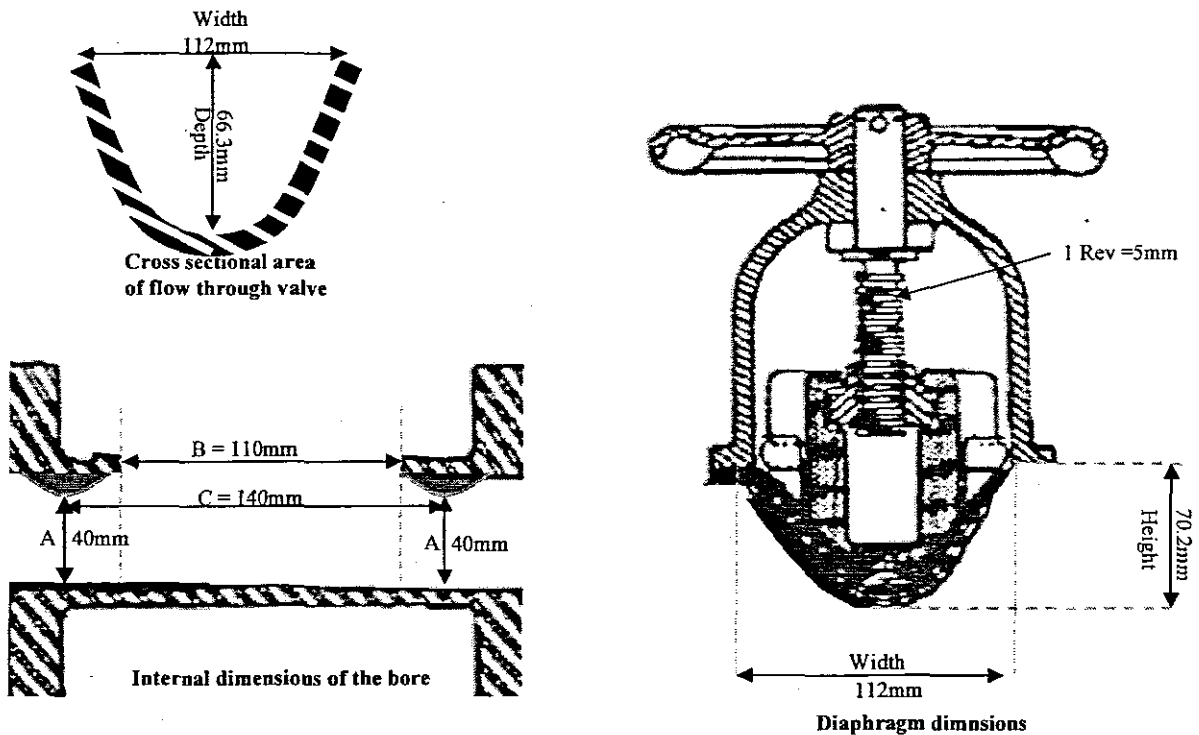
5 Internal dimension of the 80 mm nominal bore diaphragm valve.
